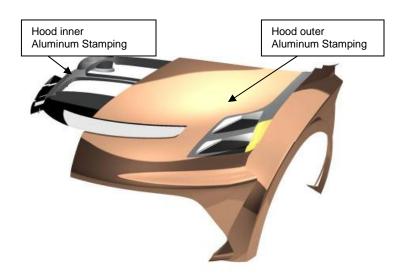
f: Hood and Fender Assembly and Front End Module
